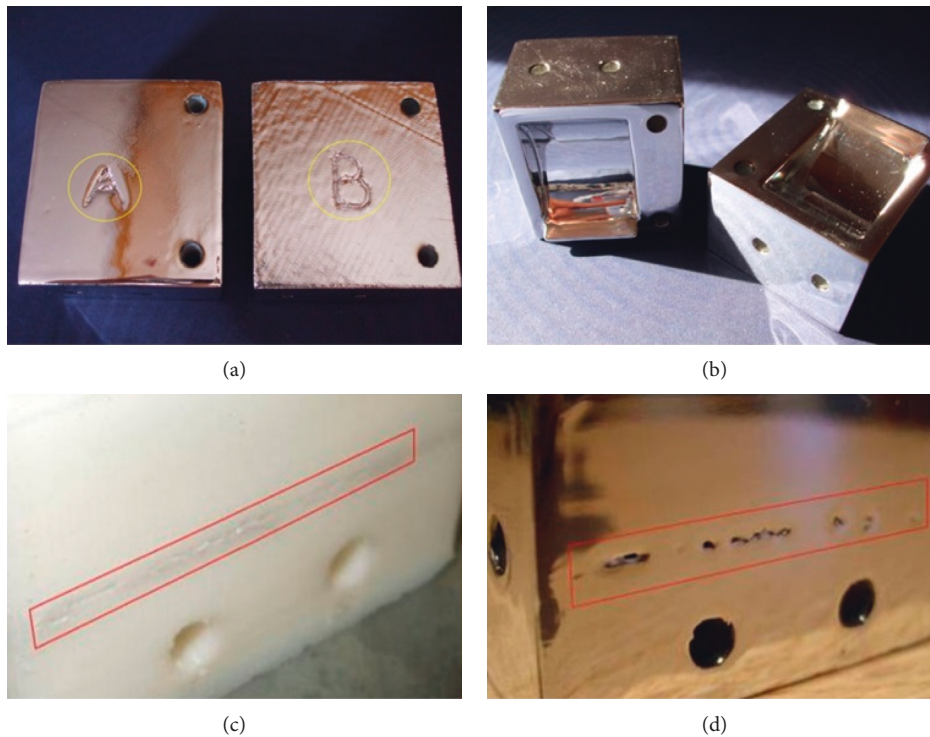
PVD test pieces and superficial defects on the test pieces.
